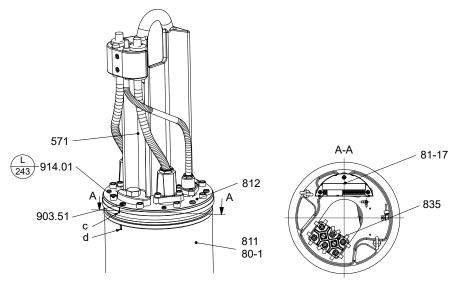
Fitting the motor housing cover, pump set with sensor system
